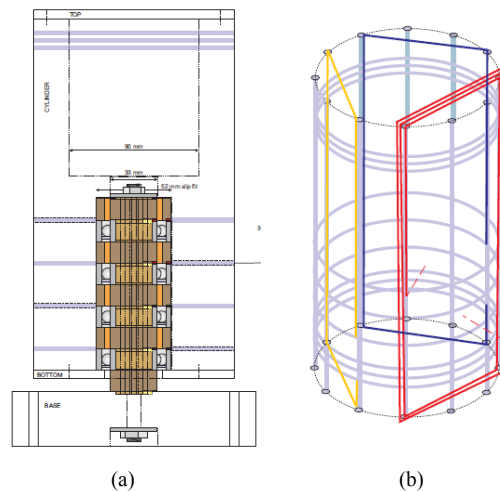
a) Cross sectional view of the motor assembly illustrating the placement of the bearings and interleaved Delrin spacers in brown. b) Schematic of the phase winding layouts on the outside of the cylinder in red, blue and yellow. Each phase winding will have grooves in the cylinder which will hold the wiring in place.
